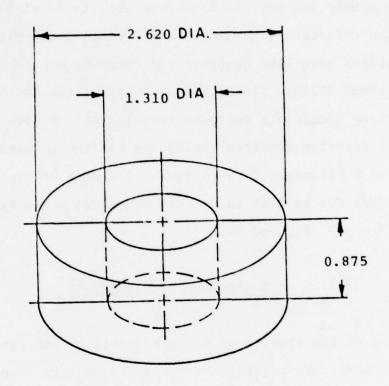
A sketch showing the dimensions of ring compression specimens used on this program
